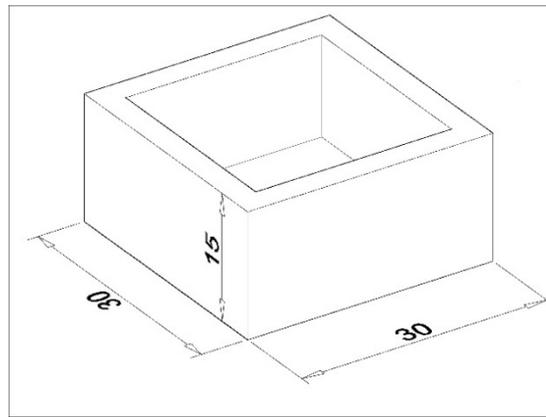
3D model design and its nominal dimensions in millimeters (mm).
